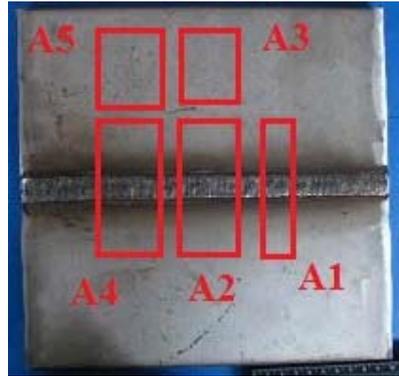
Cut samples locations for pitting corrosion resistance testing
